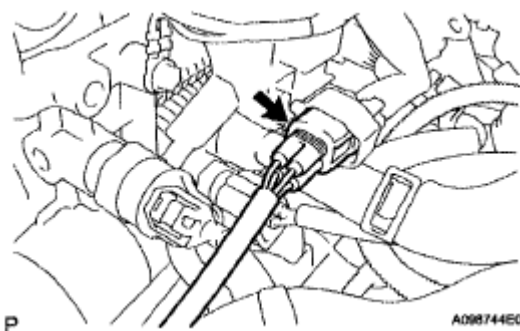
Locating Air Fuel Ratio Sensor Connector
